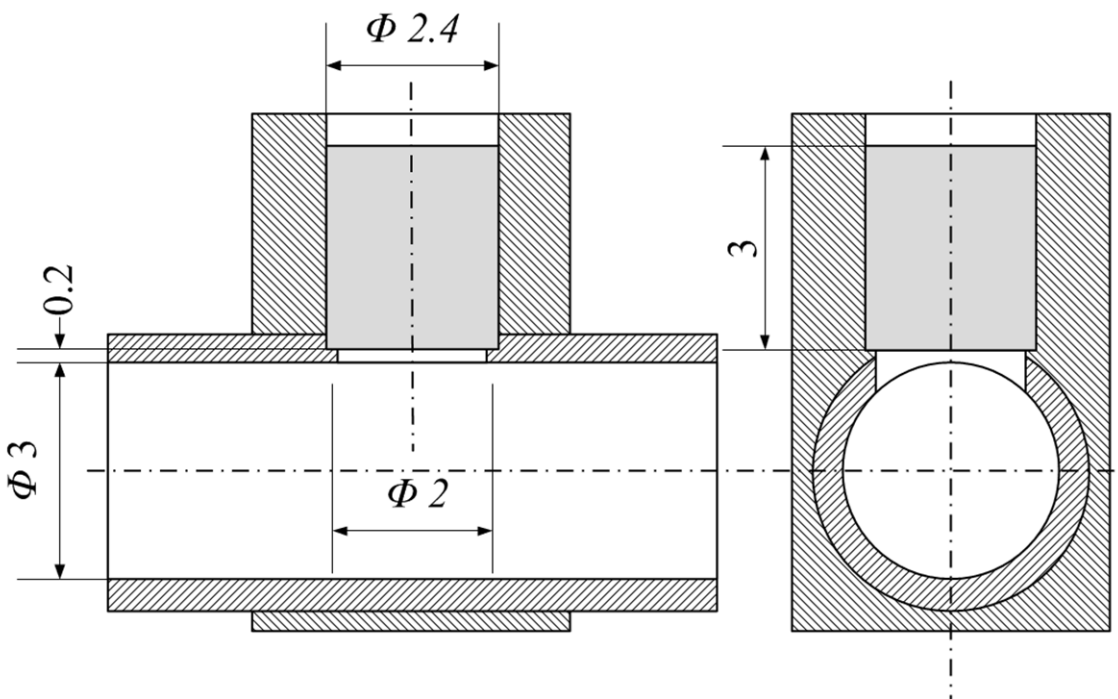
Sketch of the sensor housing (dimensions in millimeters)
